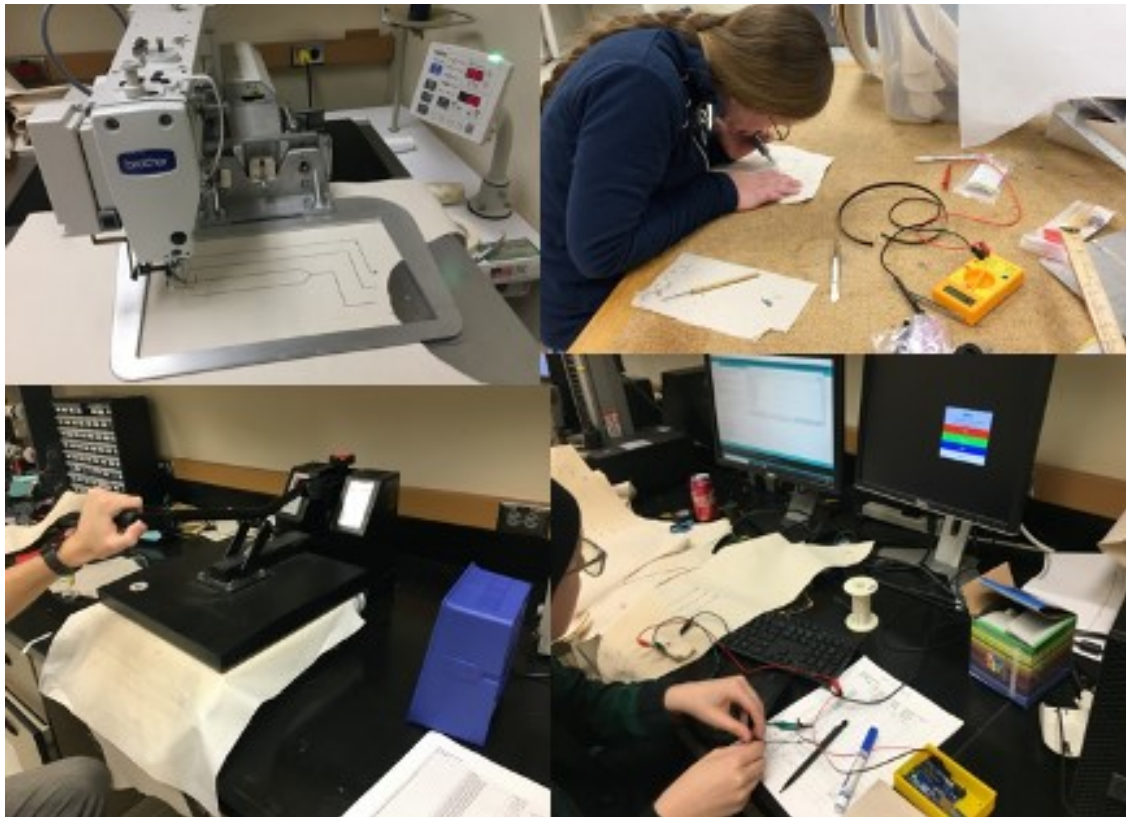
Steps involved in sensor attachment: trace layout is stitched using pattern stitcher (top left); soldering and mounting sensor on the trace layout (top right); pressing using heat press (bottom left); Quality Assurance testing using Arduino-Uno setup (bottom right)
